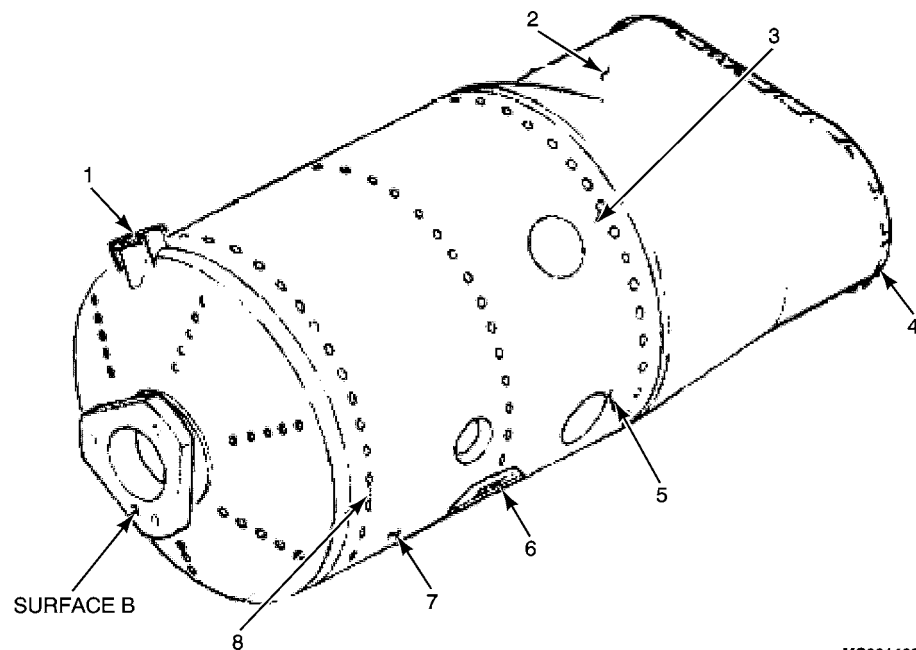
Combustor Assembly (MEP 83-360A and MEP 83-360D/E).
